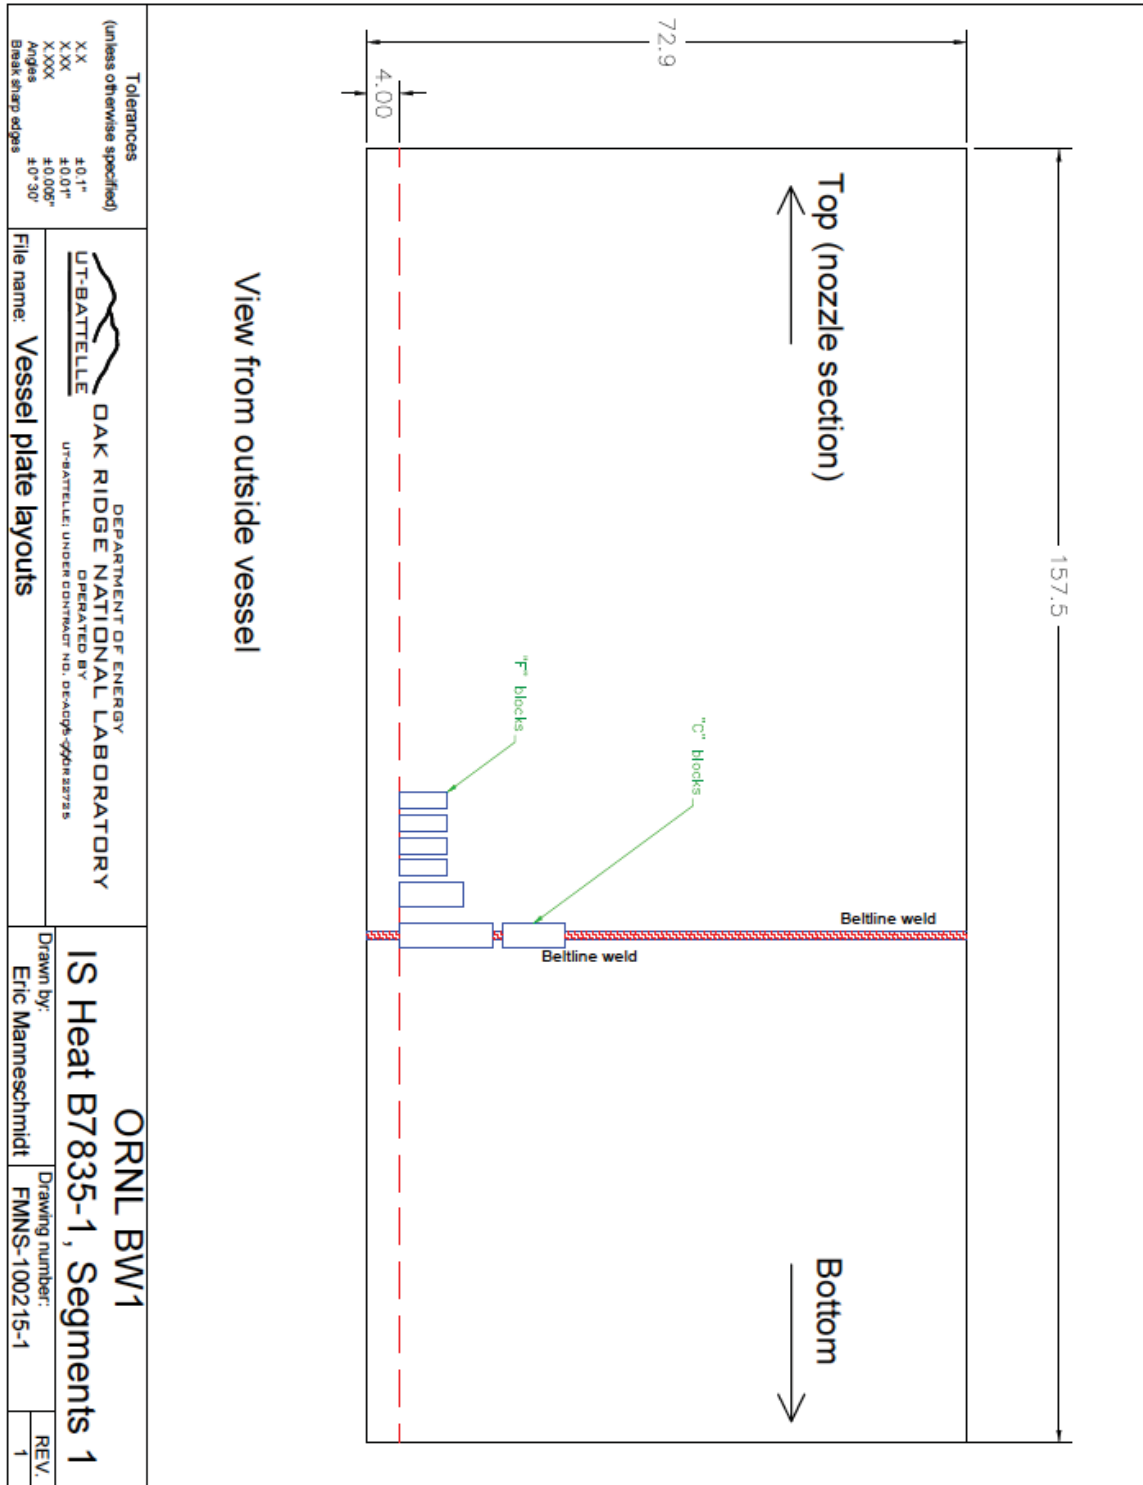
Cutting plan for the Zion Unit 1 RPV (ORNL BW1) segment (ZS Segment 1 or 3) that contains only the beltline weld and base metal heat B7835-1 (See Figure 4, Figure 5, and Figure 6).
